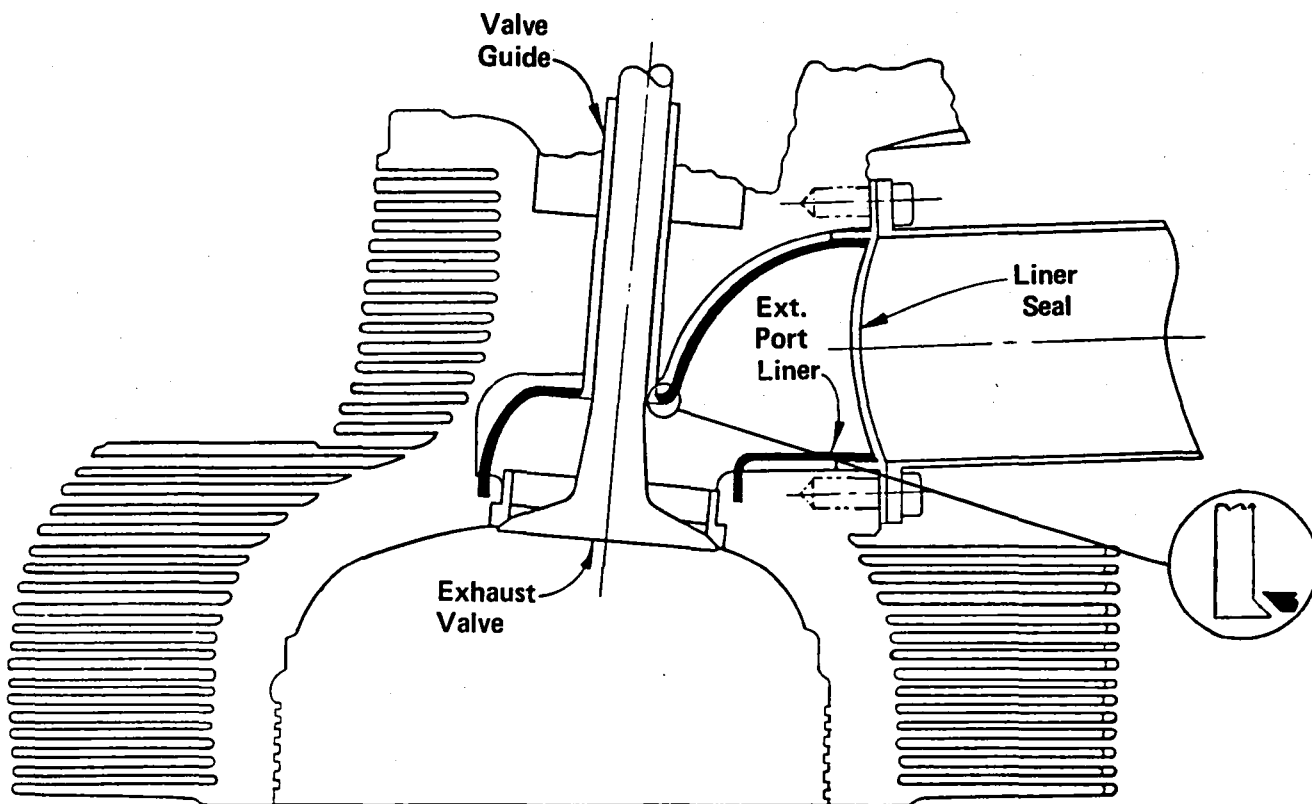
Cross-sectional view of exhaust port liner as cast in IO-520 cylinder head.
